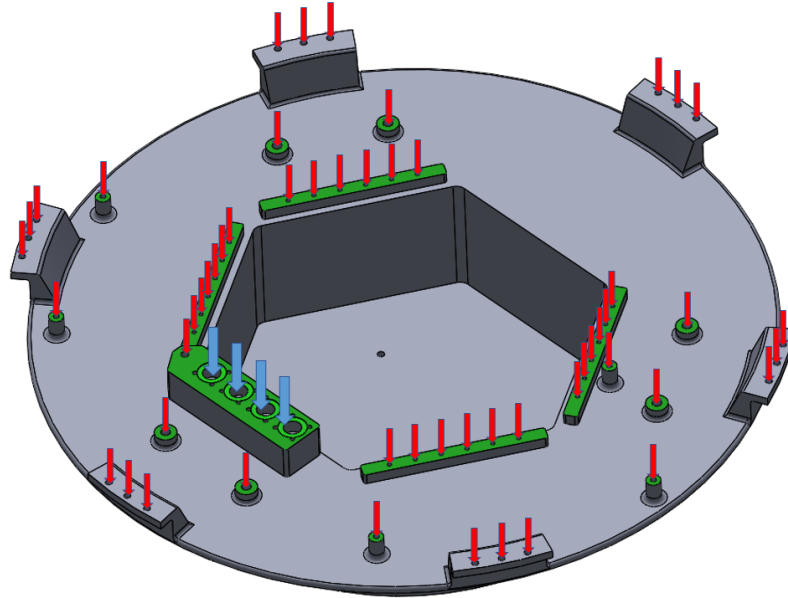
Top view of the instrument tray, showing machined surfaces. Red arrows show tapped hole locations, blue arrows show valve locations, and green surfaces show critical mating features that must be milled flat.
